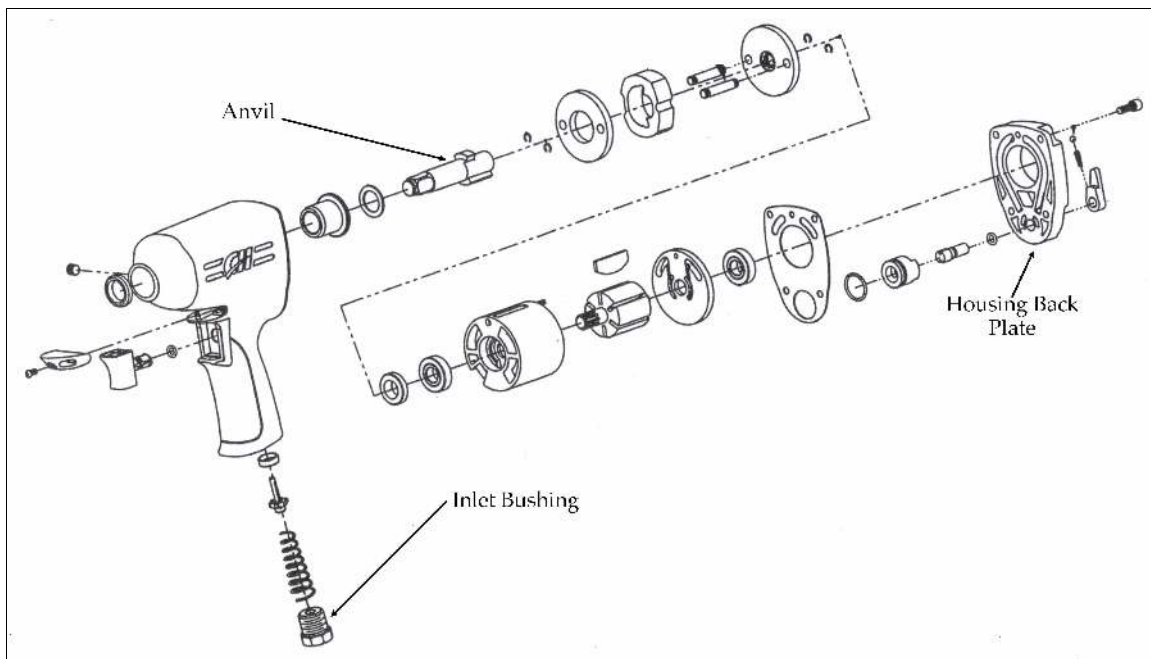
Exploded View of Campbell Hausfeld 1/2" Air Impact Wrench.
